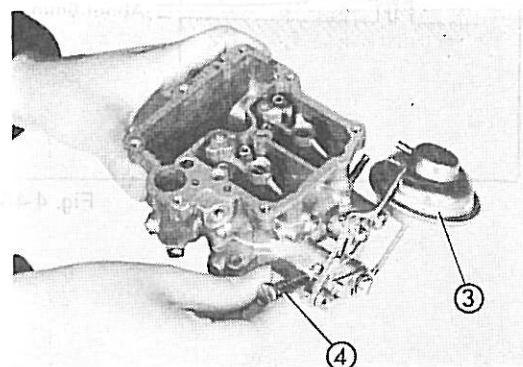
Assembling Diaphragm and Throttle Adjusting Screw
